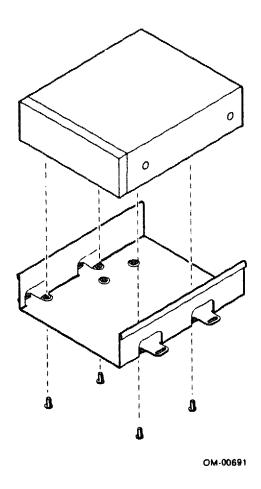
Removing a SCSI Device from a 5.25-Inch Mounting Tray
